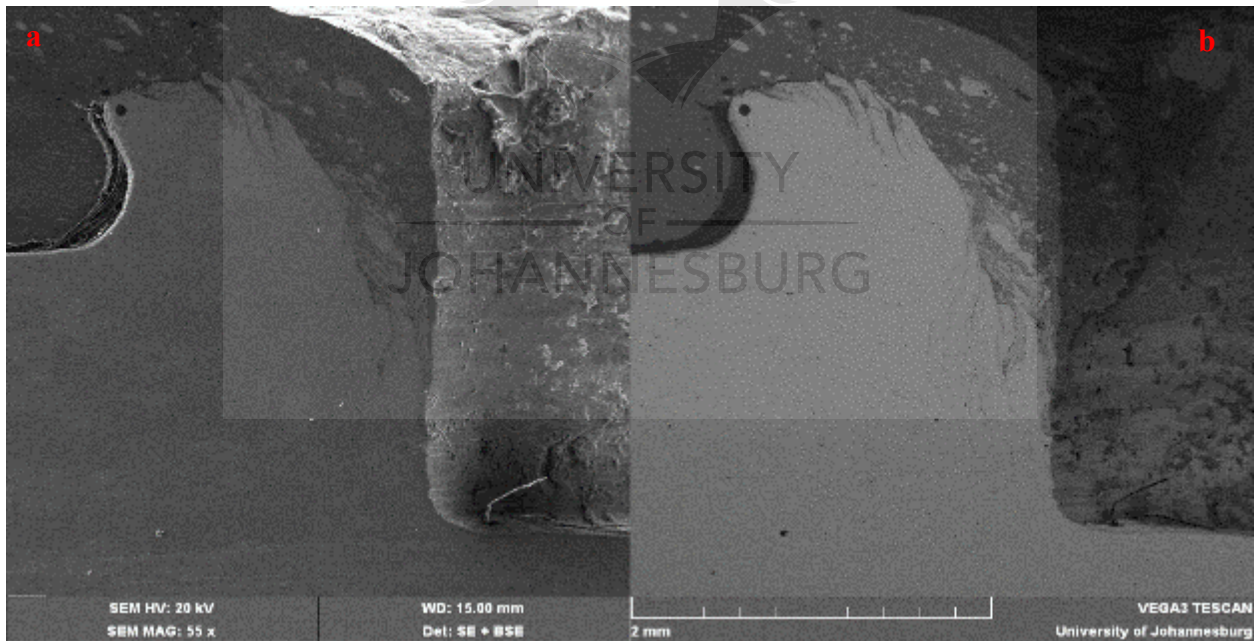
Showing a secondary electron (a) and a backscattered electron (b) images of the spot weld produced at 800 rpm and 1 mm plunge depth using a flat pin and a flat shoulder tool
